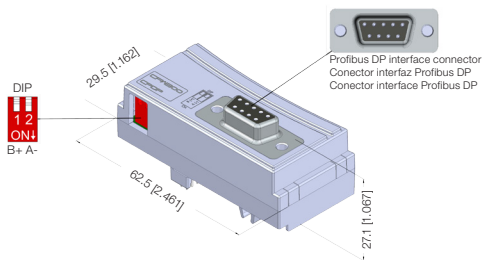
CFW300-CPDP dimensions in mm [in] and connectors location
